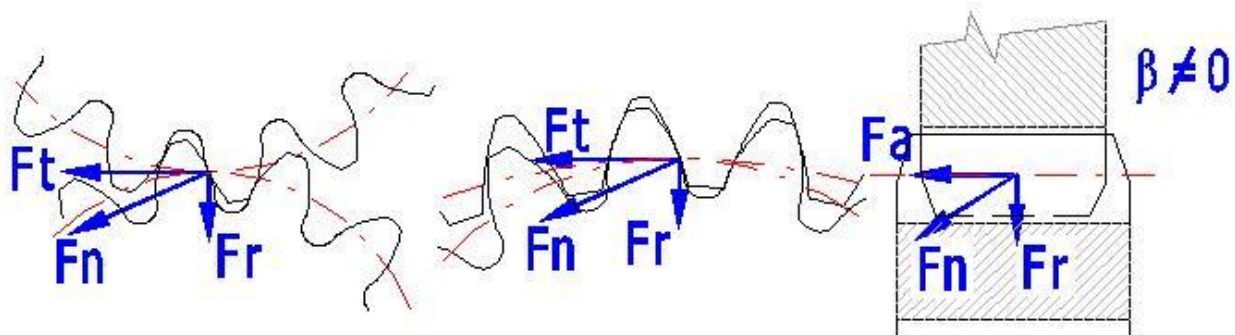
Tooth forces of loaded gearing (Courtesy of MITCalc, mechanical design software).
